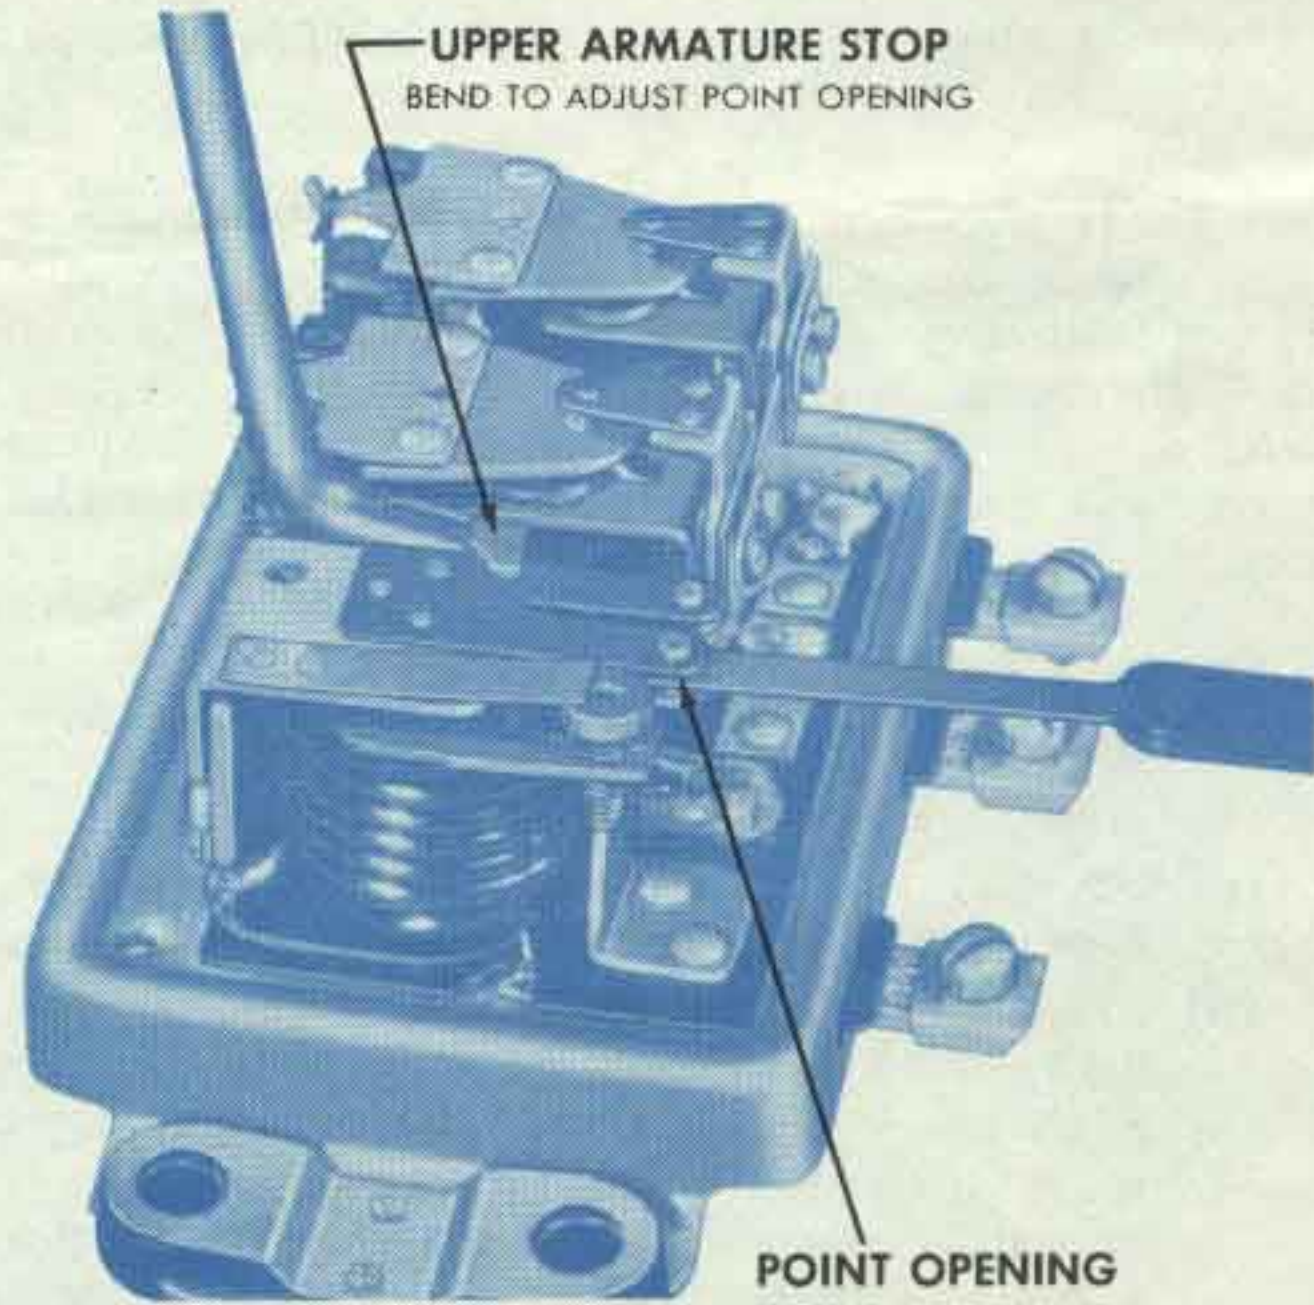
Cutout relay point opening check and adjustment. Battery must be disconnected when this check is made.
